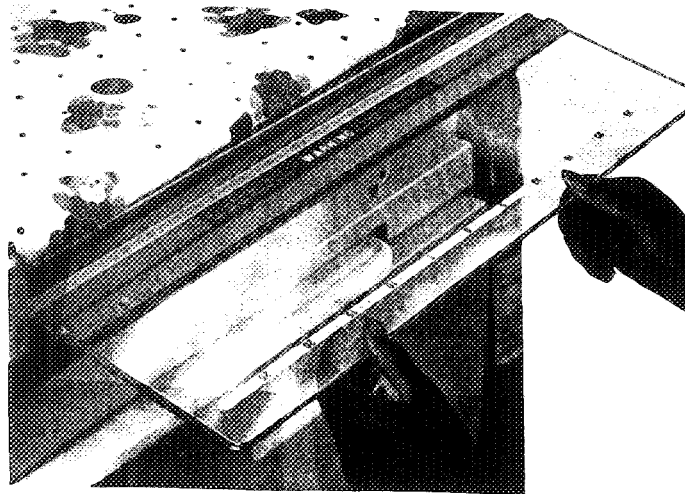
CHECKING THE BASSINET SIDE PANELS
